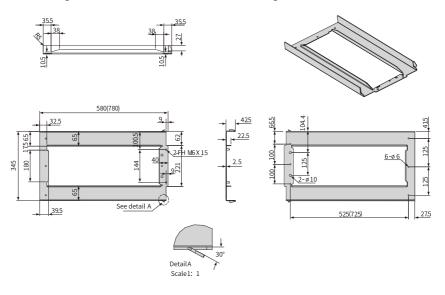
Dimensions of the bottom mounting bracket for T12 models
